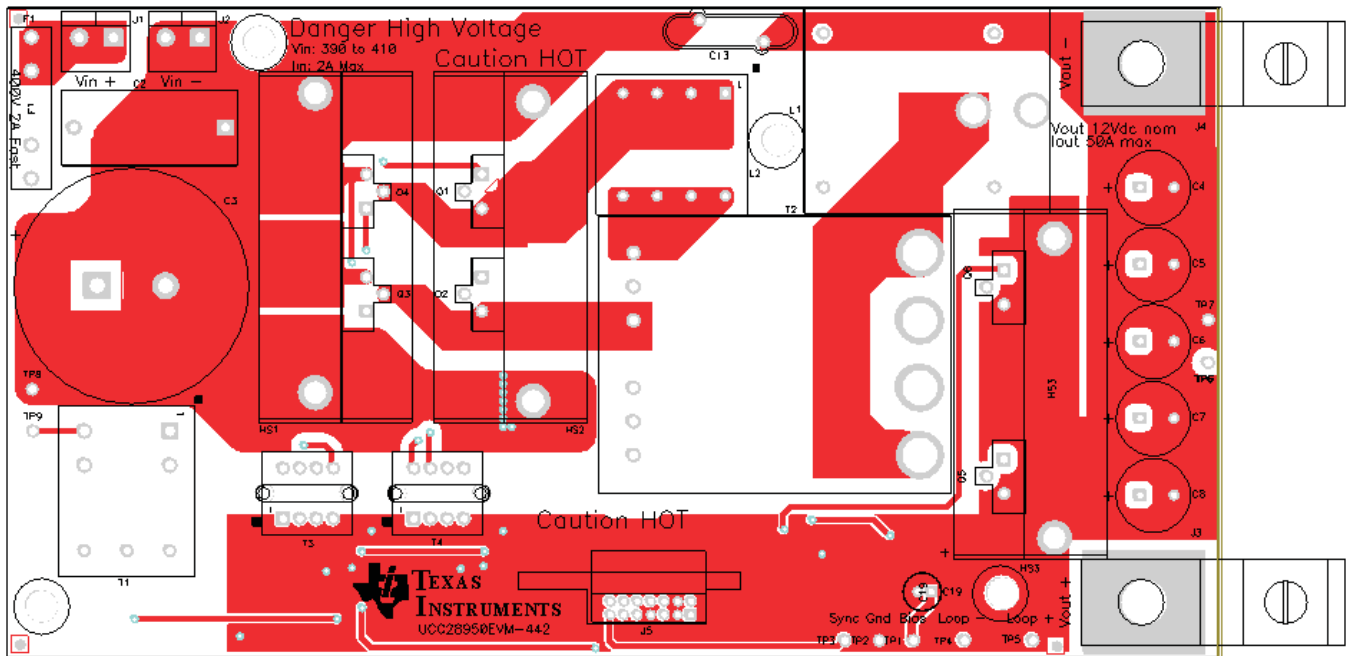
UCC28950EVM-442 Power Stage Top Layer Assembly Drawing (top view)
